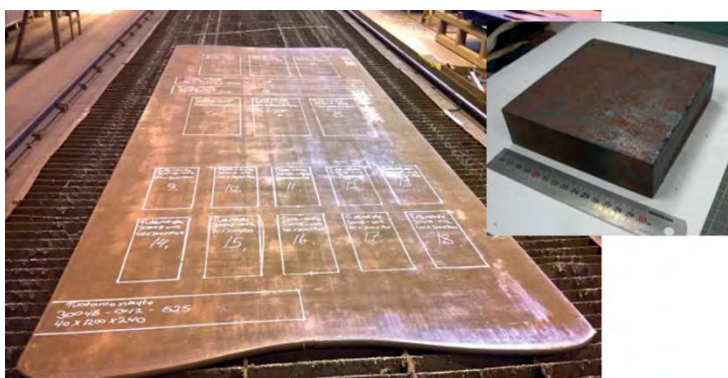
Wear-resistant steel plate with sectioning plan and an example of studied flame cut sample.
